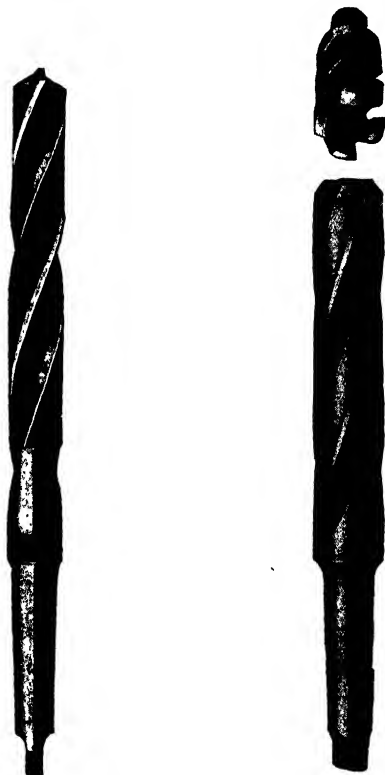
The Standard Taper Shank Twist Drill. FIG. 466.--Four-fluted Chucking Drill.
